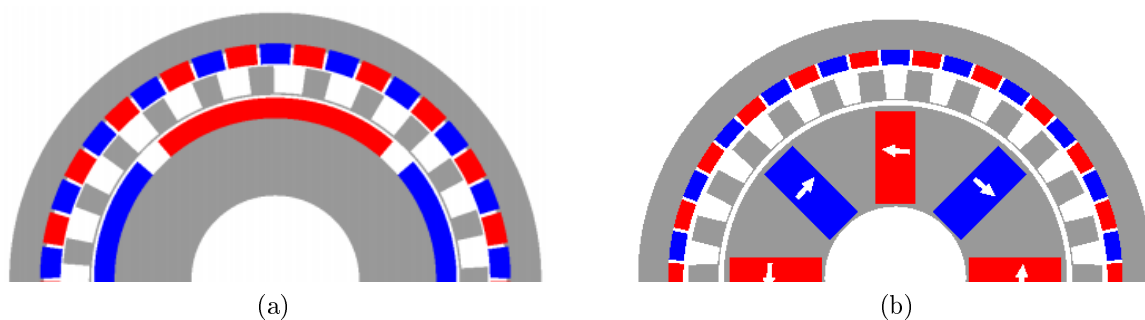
Radial flux modulated coaxial magnetic gears [6; 7]: (a) surface mounted PMs on both rotors and (b) flux concentrating inner PM rotor.
